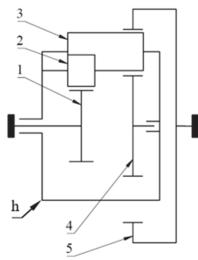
Schematic layout of Ravigneaux planetary gearset: 1) small sun gear, 2) planetary gear (satellite), 3) external planetary gear, 4) big sun gear, 5) sun gear with inner teeth, h) planetary gears carrier
